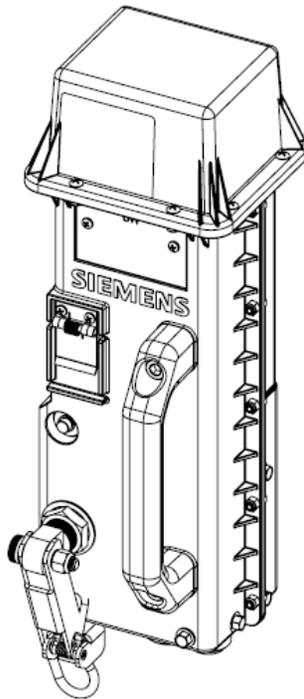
Main Assembly with HP Manifold, A90388 Sheet 1
